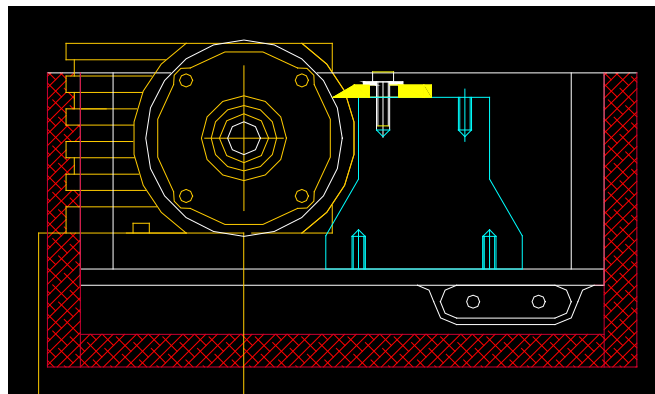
Detailed design of the Doctor's blade/ peers assembly
